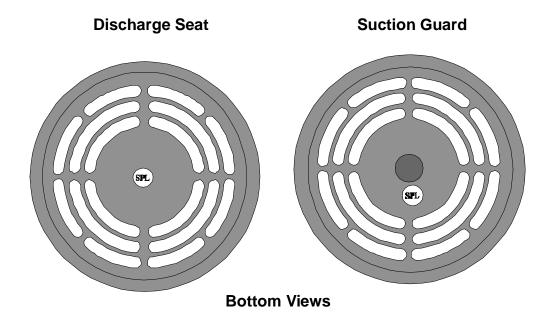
SPIRALOCK THREADED VALVE ASSEMBLY - MARKED "SPL"
